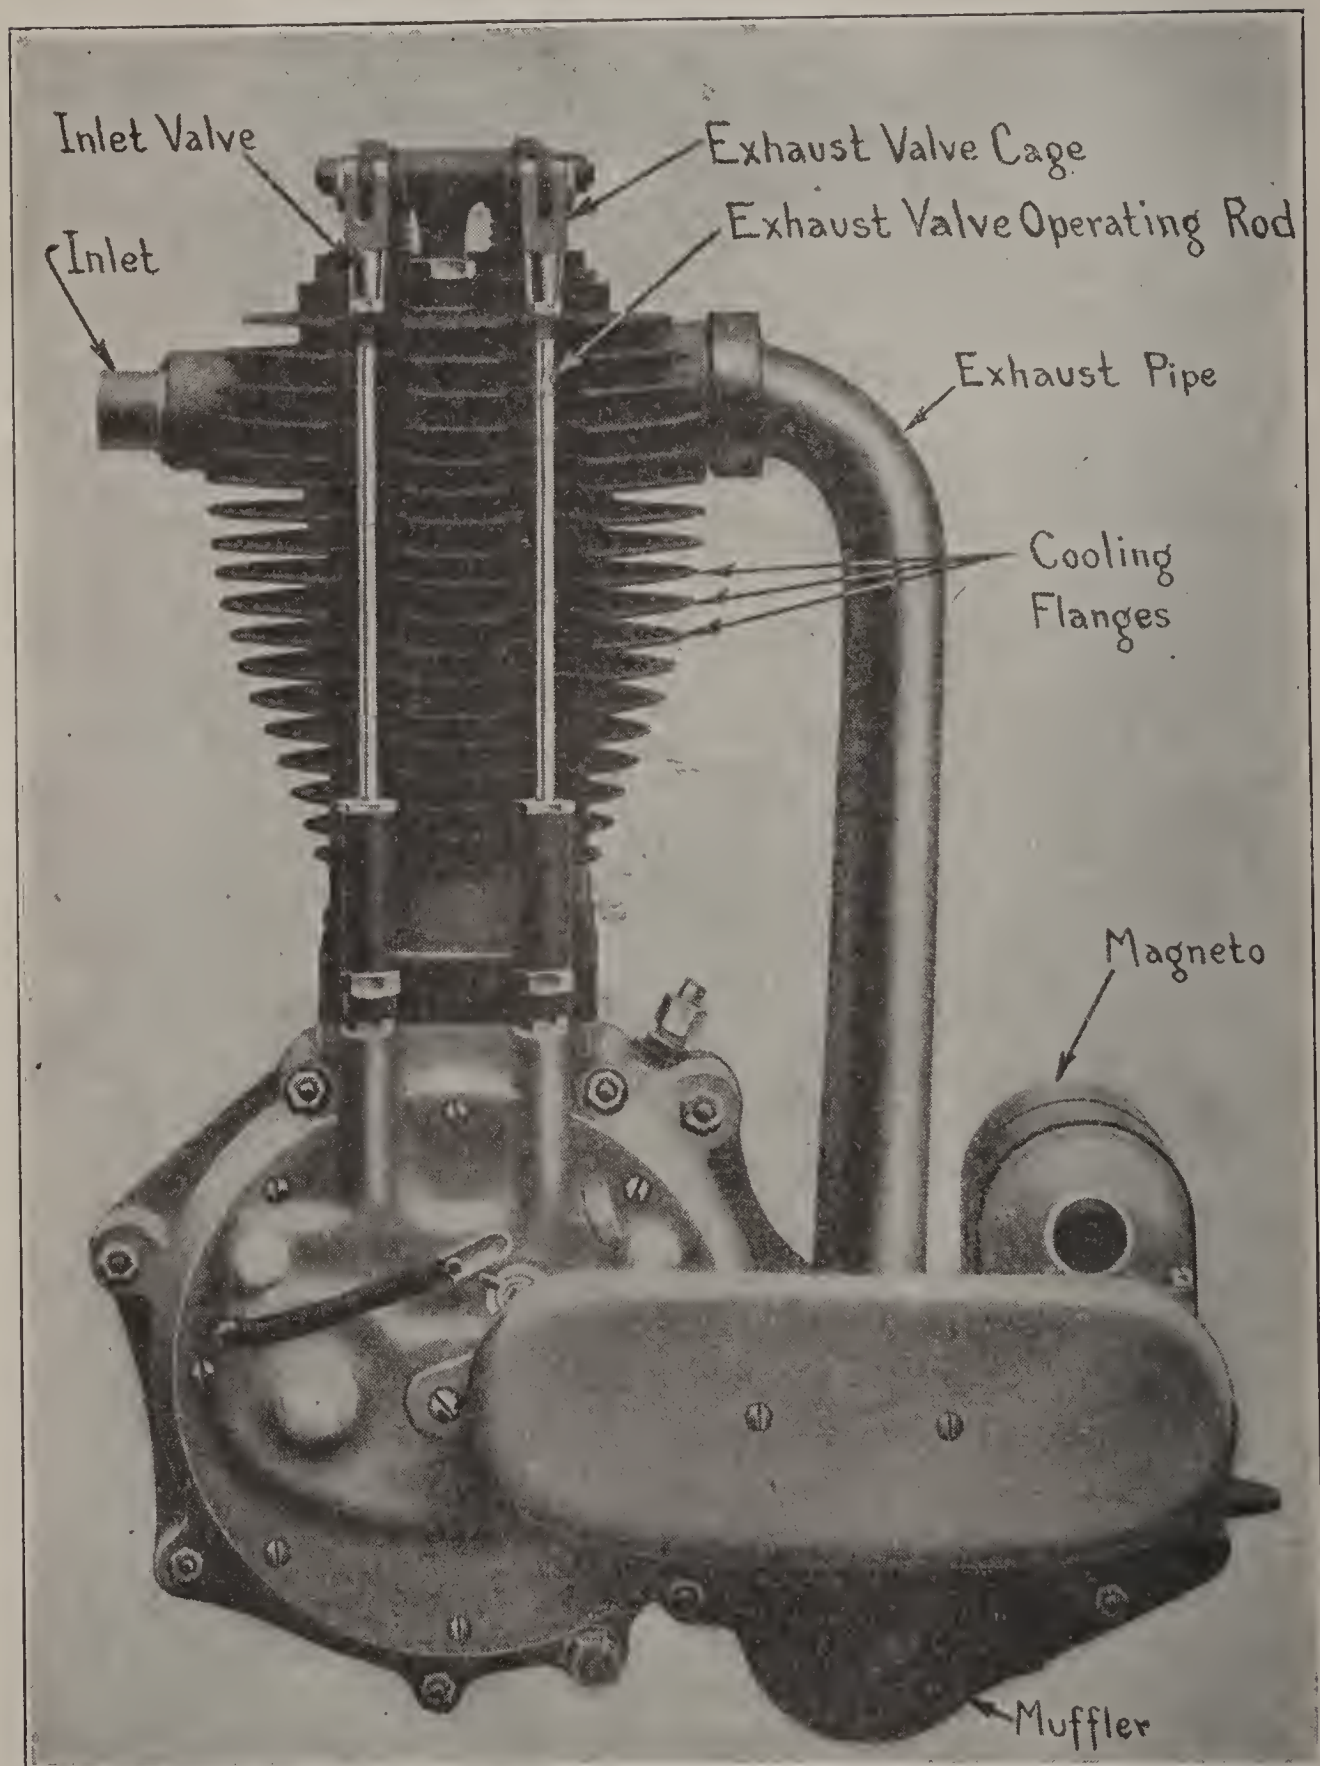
The Precision Overhead Valve Air-Cooled Motor Having Cooling Flanges of Graduated Diameters.
